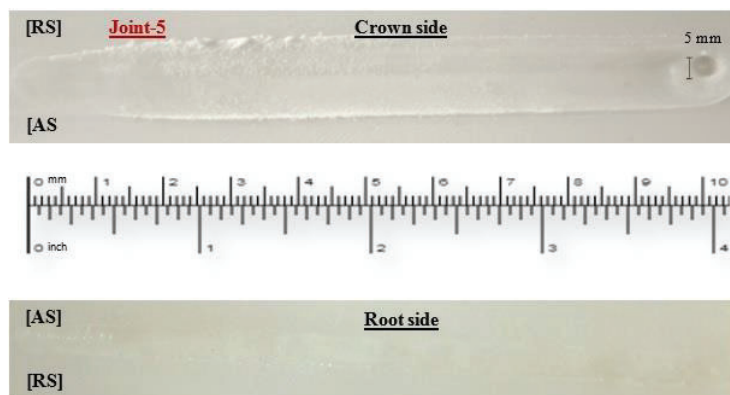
Joint-5 material flow, surface finish, and surface defects
